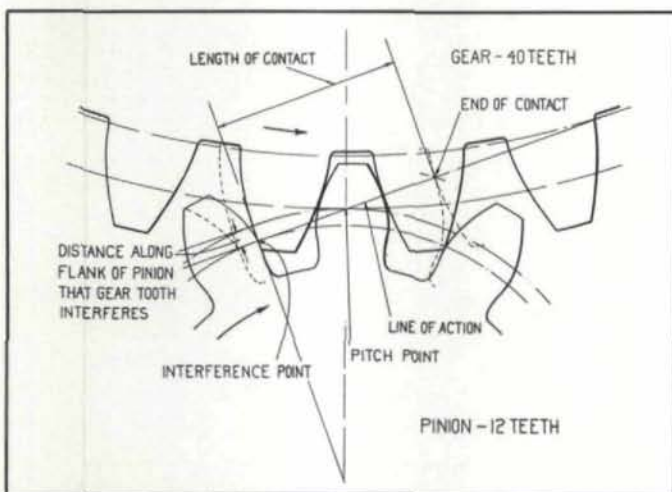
Diagram illustrating interference of gear tooth with flank of pinion tooth.
